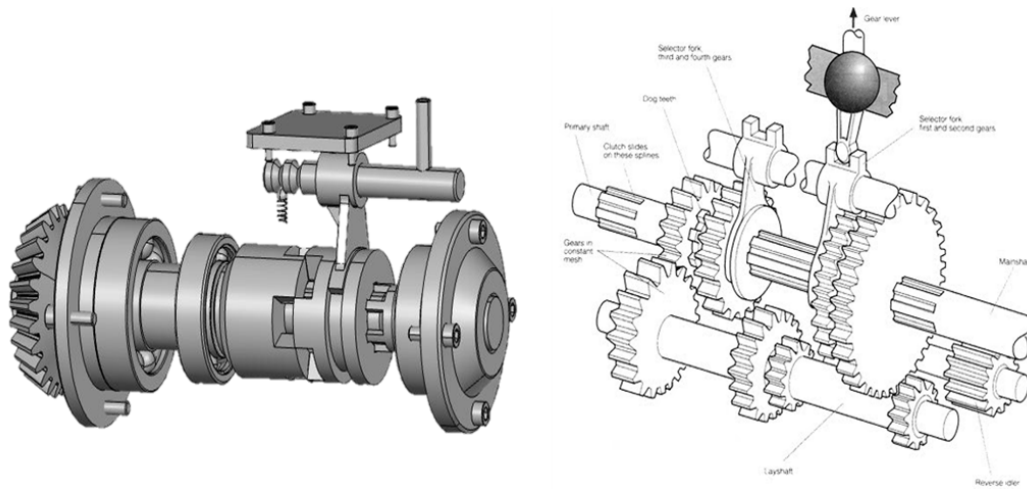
Two engagement mechanism with (a) dog clutch and (b) Sliding gear mechanism [6, 7].
